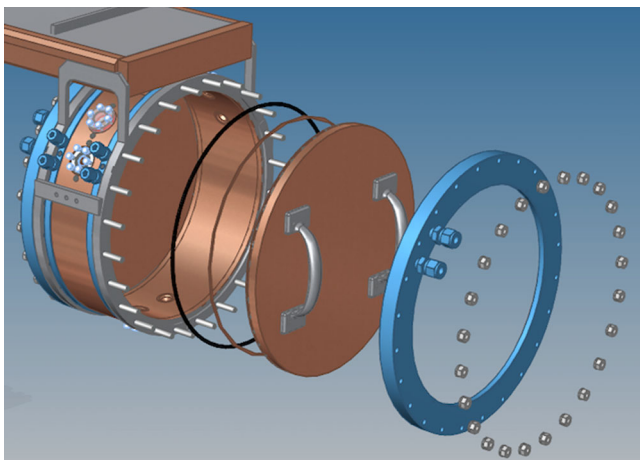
Exploded view of cavity, illustrating assembly. From left to right, components include: cavity body; Viton O-ring for vacuum seal; annealed copper gasket for rf seal; modular endplate (made of copper or beryllium in this work); removable handles for endplate installation; stainless steel clamping ring with integrated water cooling lines; nuts to apply clamping pressure, threaded onto studs mounted on cavity body.
